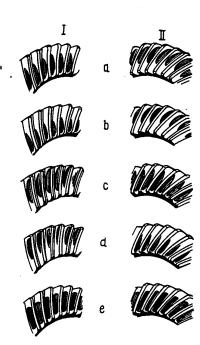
Tooth Contact of Final Drive Gears: I - forward; II - reverse; a and b - wrong tooth contact: shift drive pinion away from ring gear by reducing thickness of adjusting ring; c and d wrong tooth contact: shift drive pinion towards ring gear by increasing thickness of adjusting ring; e - correct tooth contact
